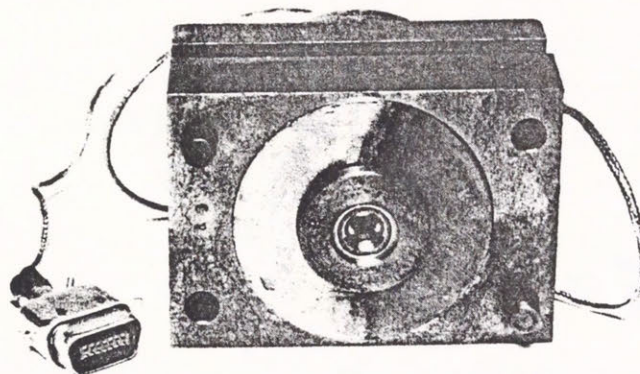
Load washer fixture. Front view showing die and adaptor ring. The Amphenol connector for the transducer indicator plug-in is seen at the left.
